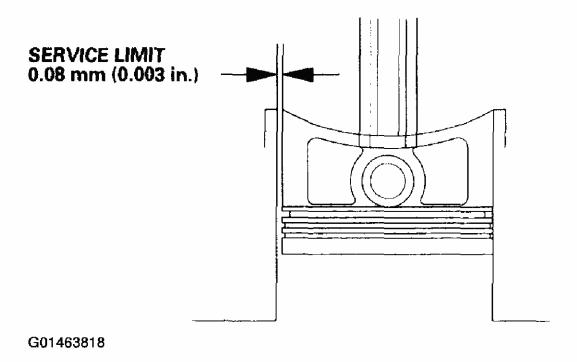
Measuring Piston-To-Block Clearance Courtesy of AMERICAN HONDA MOTOR CO., INC.
